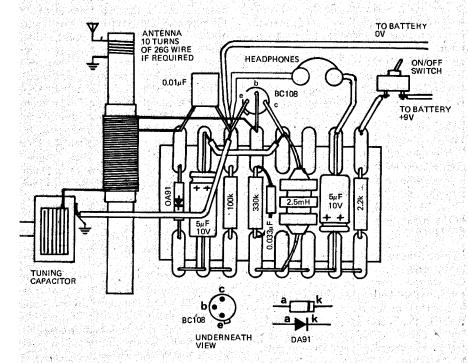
The receiver may be built on tag strips or a piece of circuit board.
